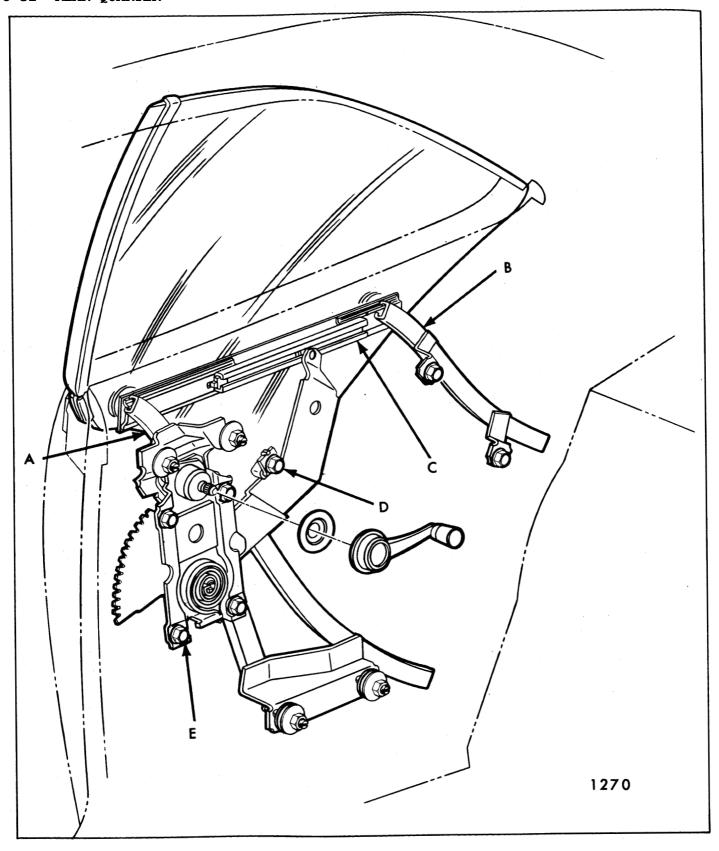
Rear Quarter Hardware - "37" Styles
